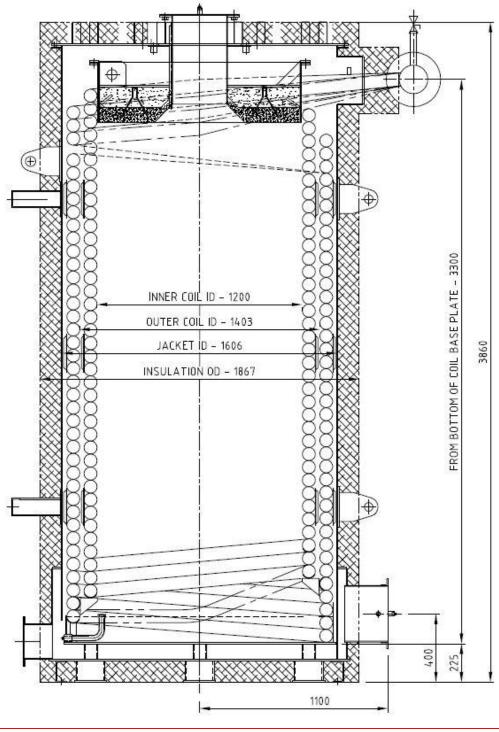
Cut section front view of Thermal Oil Heater Model TPDi-15/10
